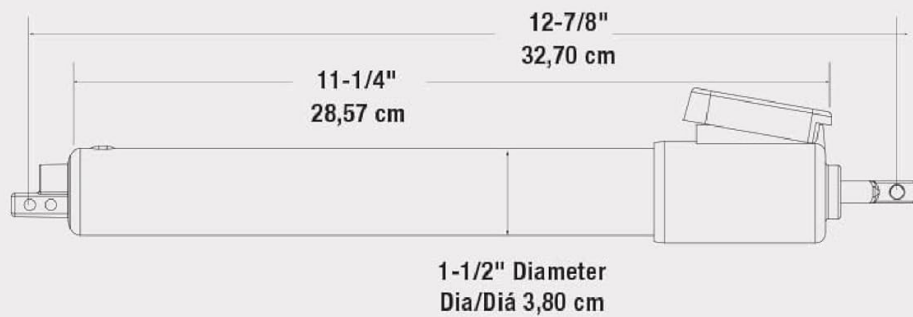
Technical diagram illustrating the dimensions of the heavy-duty pneumatic closer for proper fit and installation.
